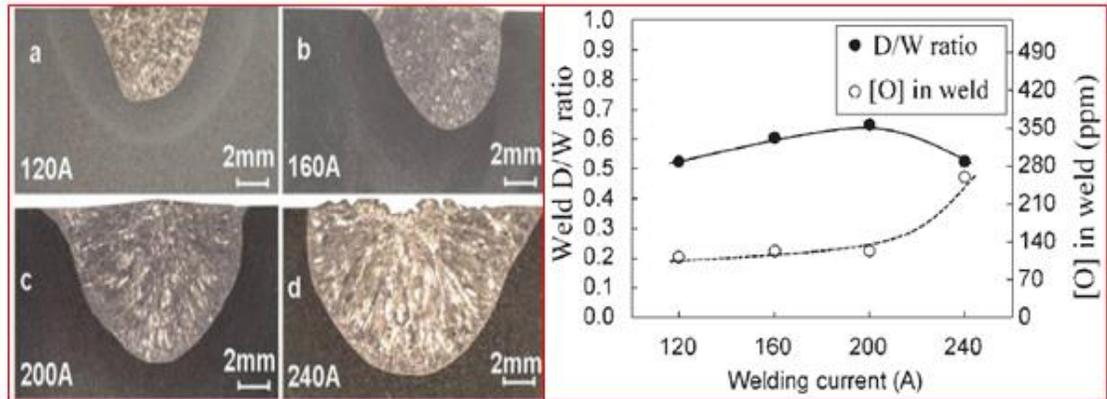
Weld shapes under different welding currents and oxygen content in weld pool (D/W ratio) [83]
